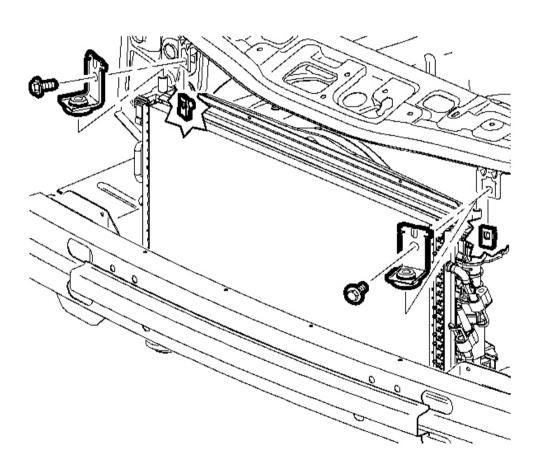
View Of CRFM Mounting Brackets To The Radiator Support Courtesy of GENERAL MOTORS CORP.
